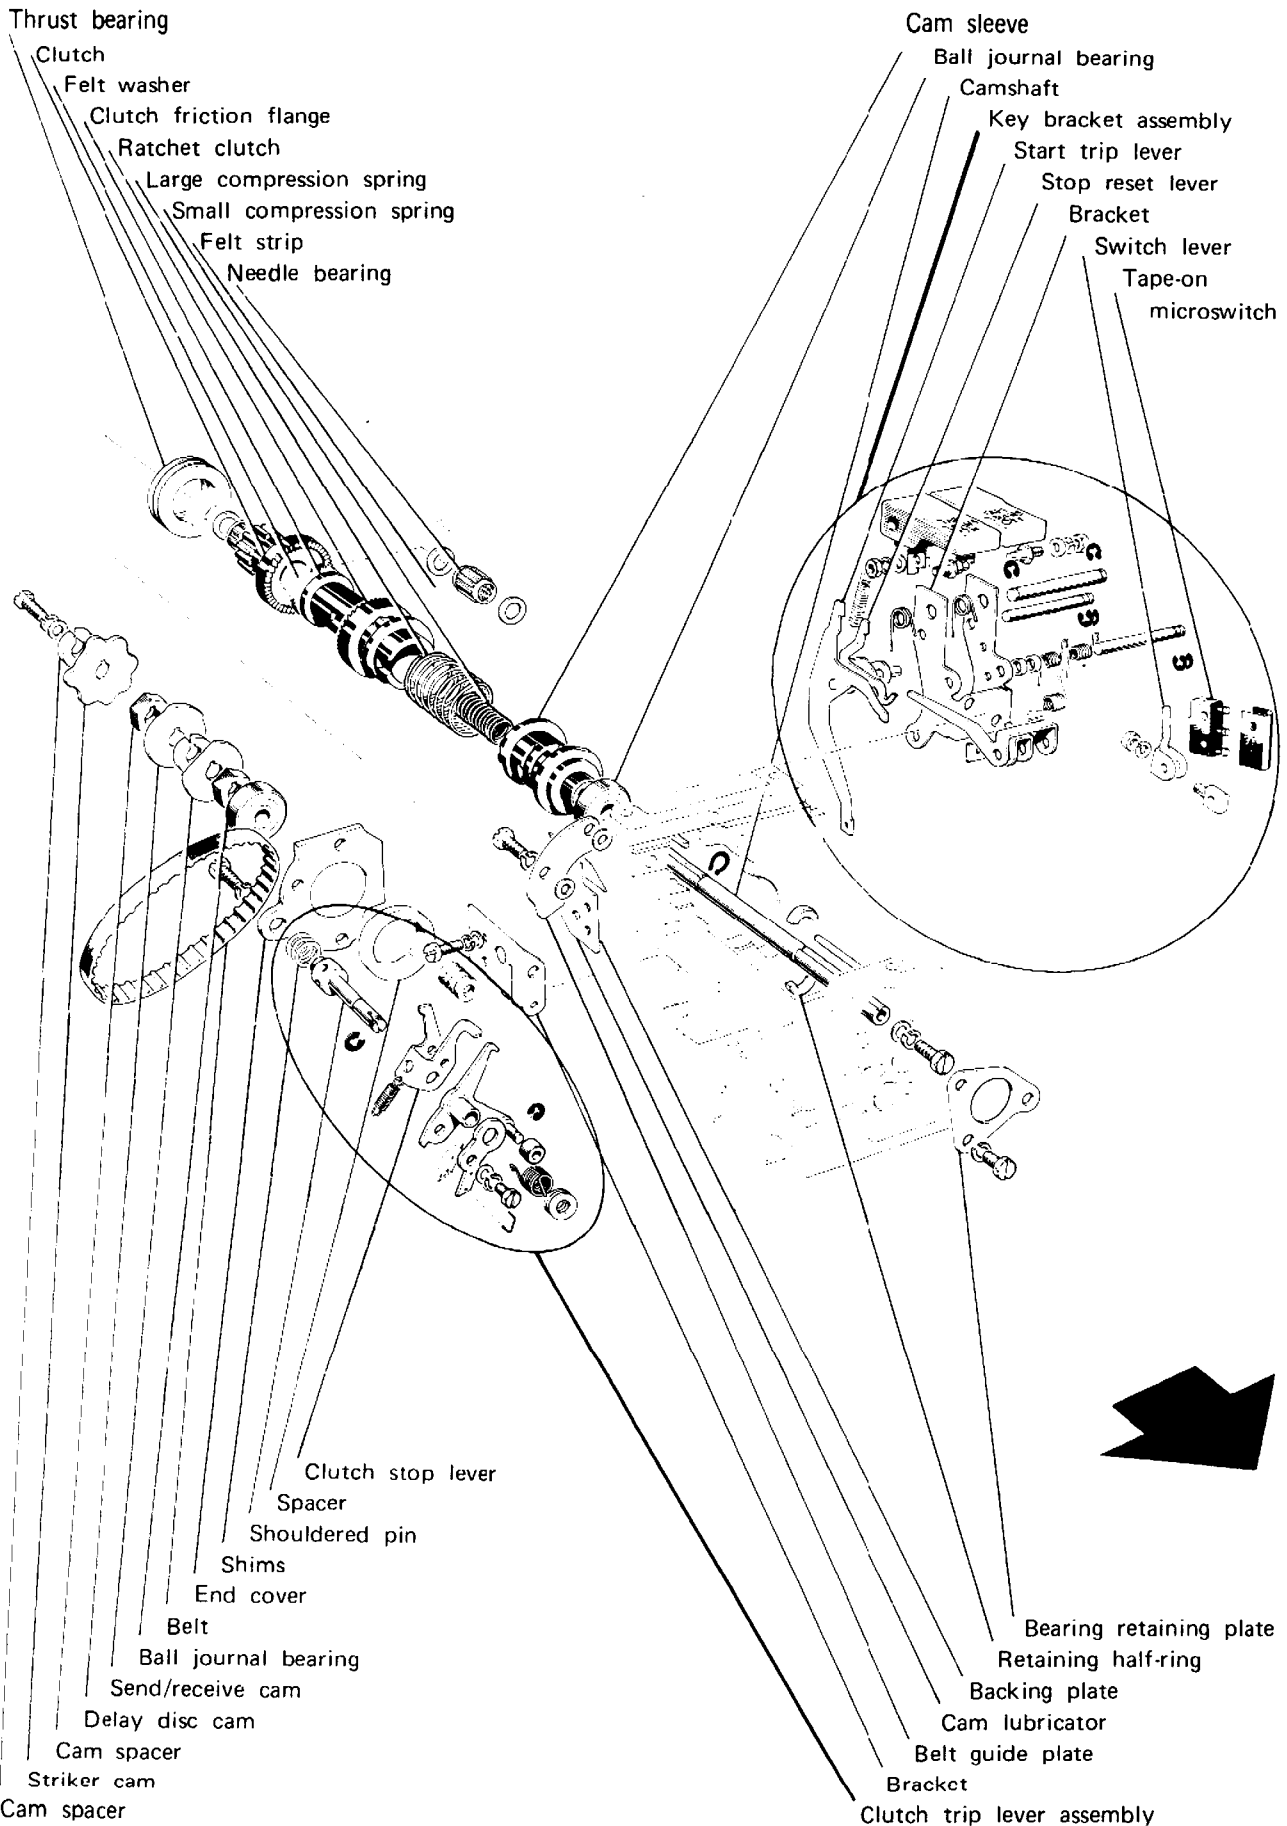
TAPE READER KEY-BRACKET AND CAMSHAFT ASSEMBLIES
